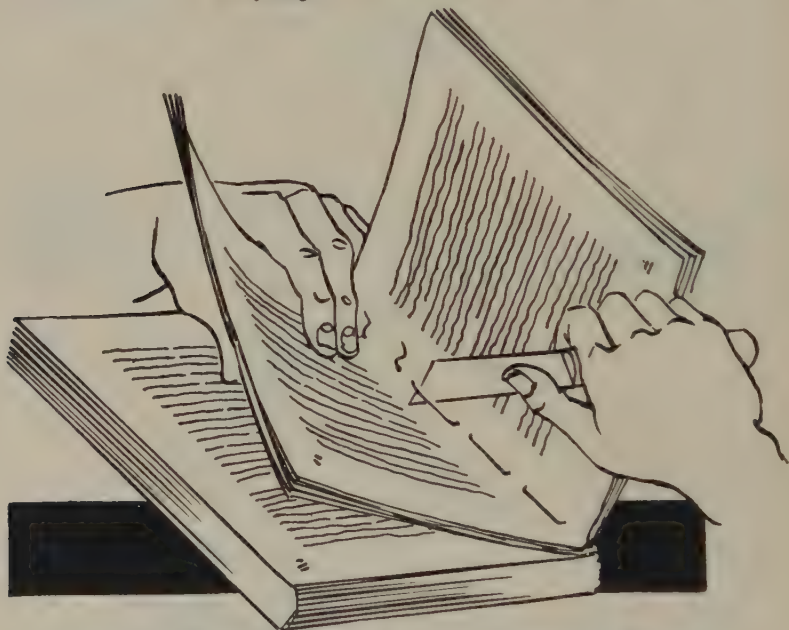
CUTTING THREAD IN LOOPS, CENTER OF SECTIONS
